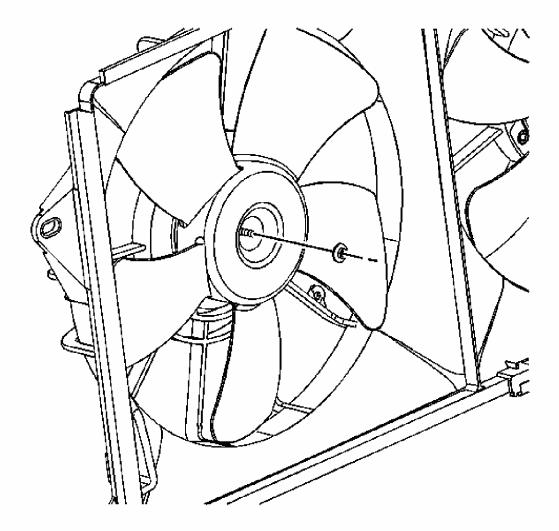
Identifying Cooling Fan Blade Retaining Nut Courtesy of GENERAL MOTORS CORP.
